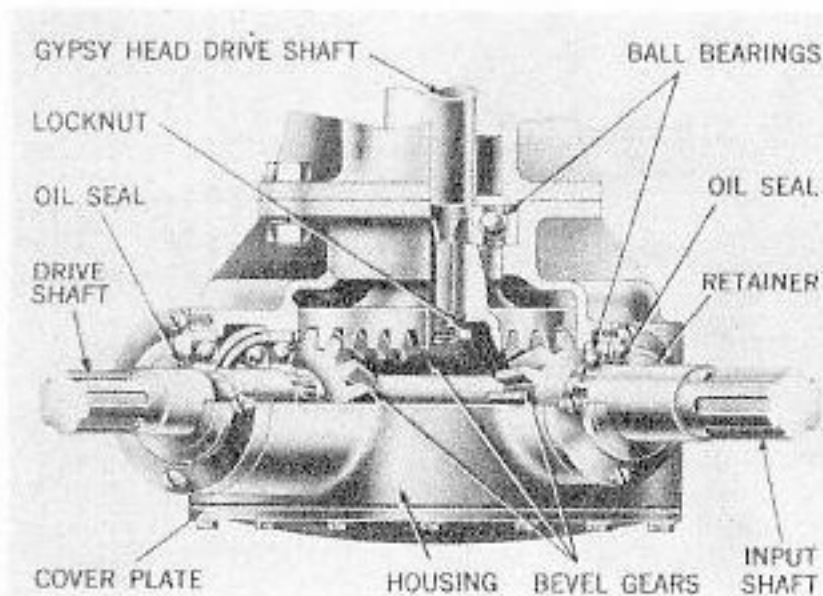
Double Shaft Gypsy Head Gear Bracket, Sectional View
